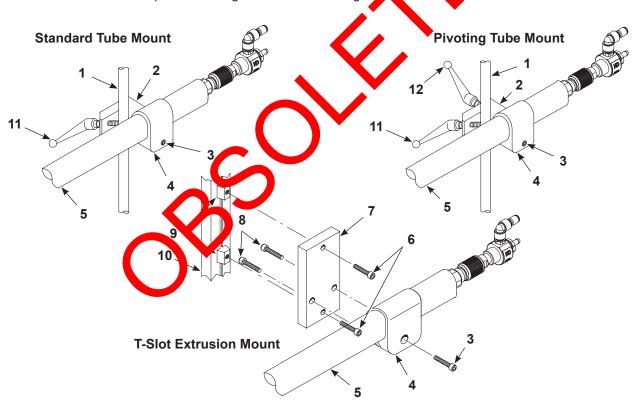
Tube-Mount Spray Gun Mounting Assemblies
